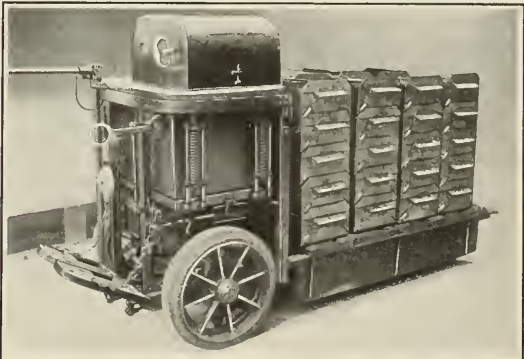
This illustration shows how steel balls are handled in the New Departure Mfg. Co.'s plant in Bristol, Conn. Balls are placed in steel tote boxes made by the New Britain Machine Co., New Britain, Conn., and stacked up on the platform of an elevating truck built by the Elwell-Parker Electric Co., Cleveland, Ohio
